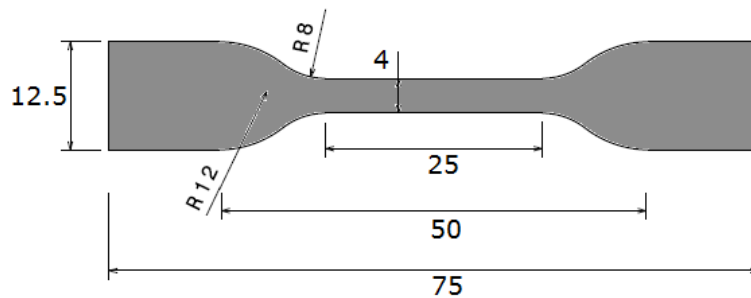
Standard dumbbell tensile test specimen (unit: mm)
